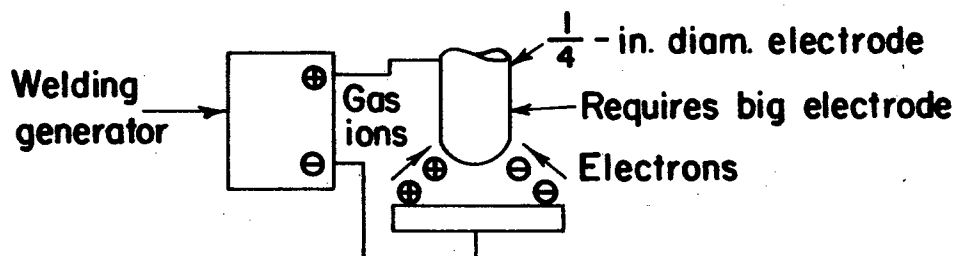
DIRECT-CURRENT REVERSE-POLARITY CONNECTION FOR GAS TUNGSTEN-ARC WELDING
